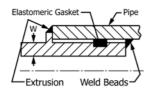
Typical Bell and Spigot, Gasketed Type Joint Constructions
